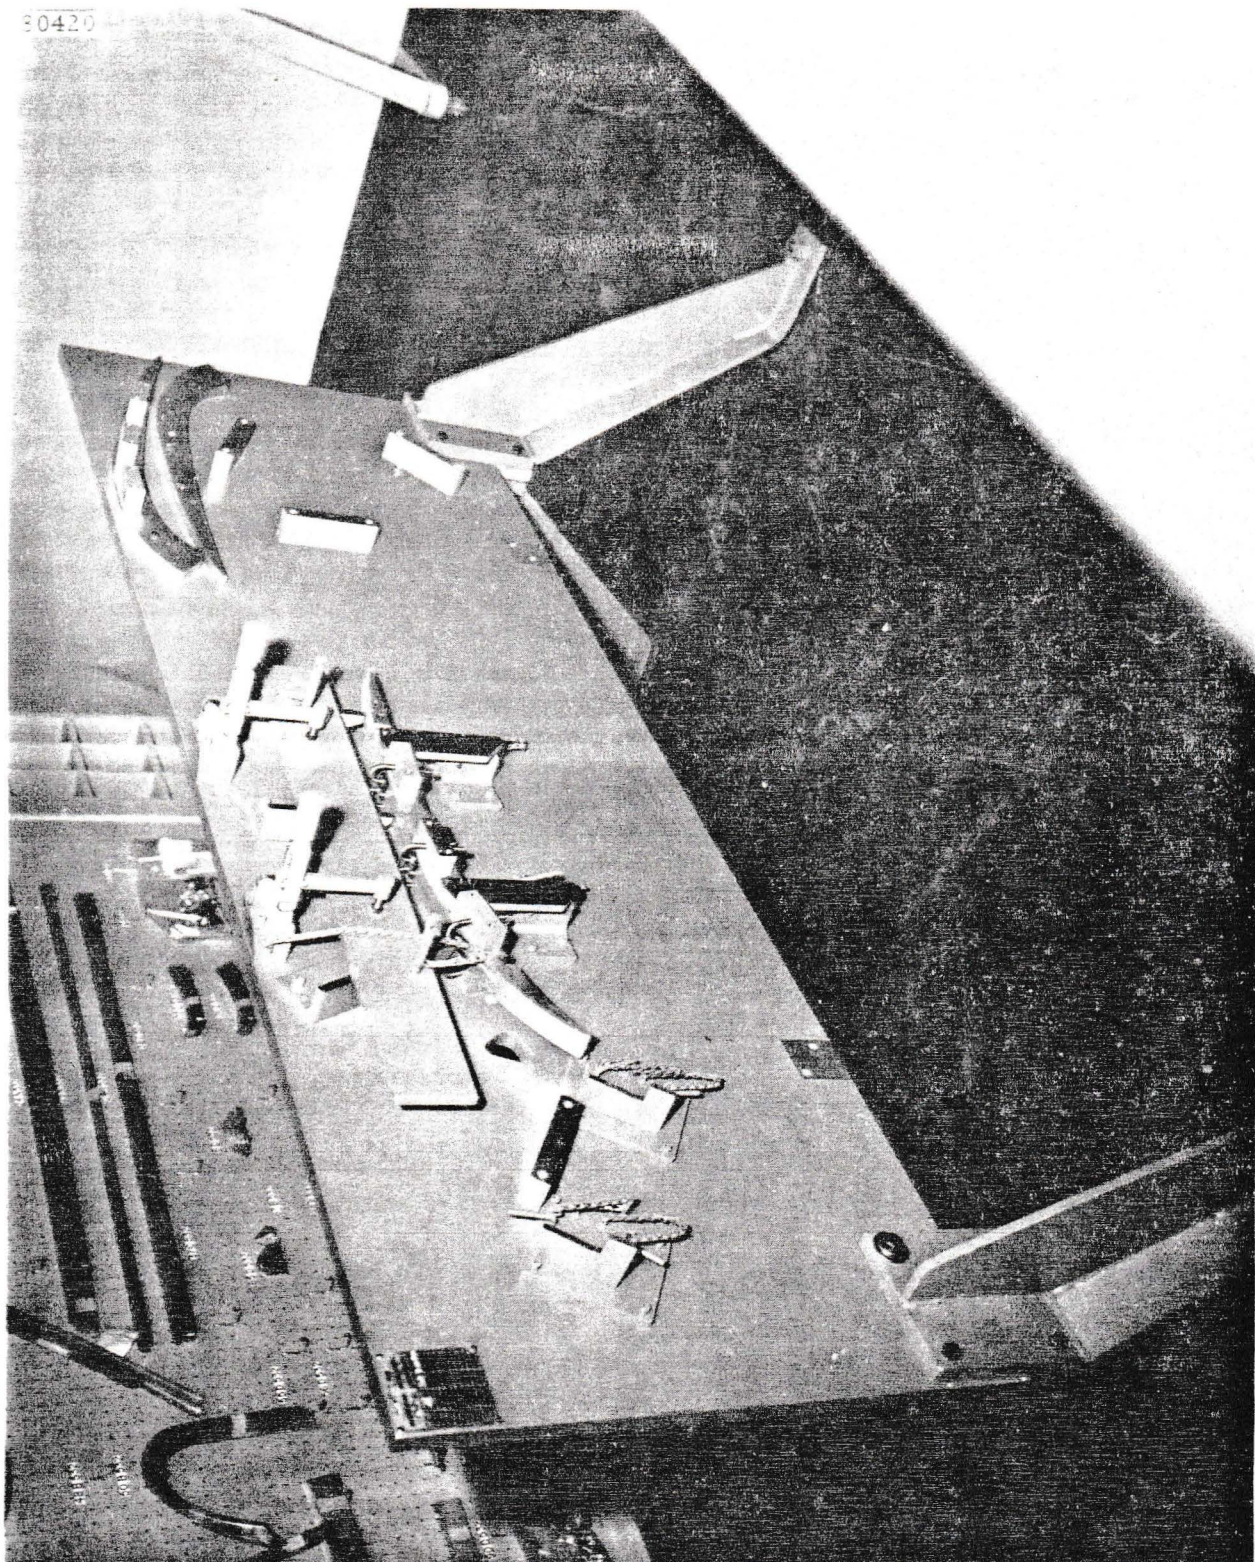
SUB-ASSEMBLY JIG FOR ENGINE INTAKE DUCT RIBS
